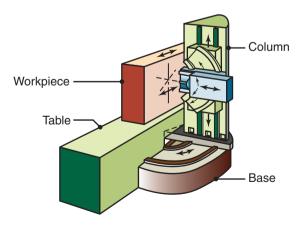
Schematic illustration of a five-axis profile milling machine. Note that there are three principal linear and two angular movements of machine components.
